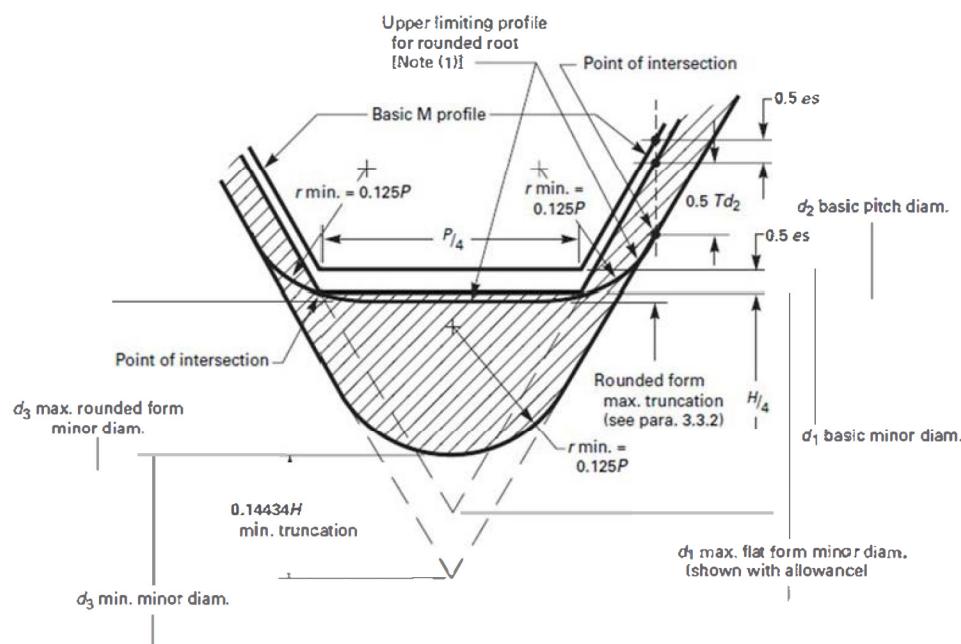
M Profile, External Thread Root, Upper and Lower Limiting Profiles for $r_{\min.} = 0.125P$ and for Flat Root Form (Shown for Tolerance Position g)
